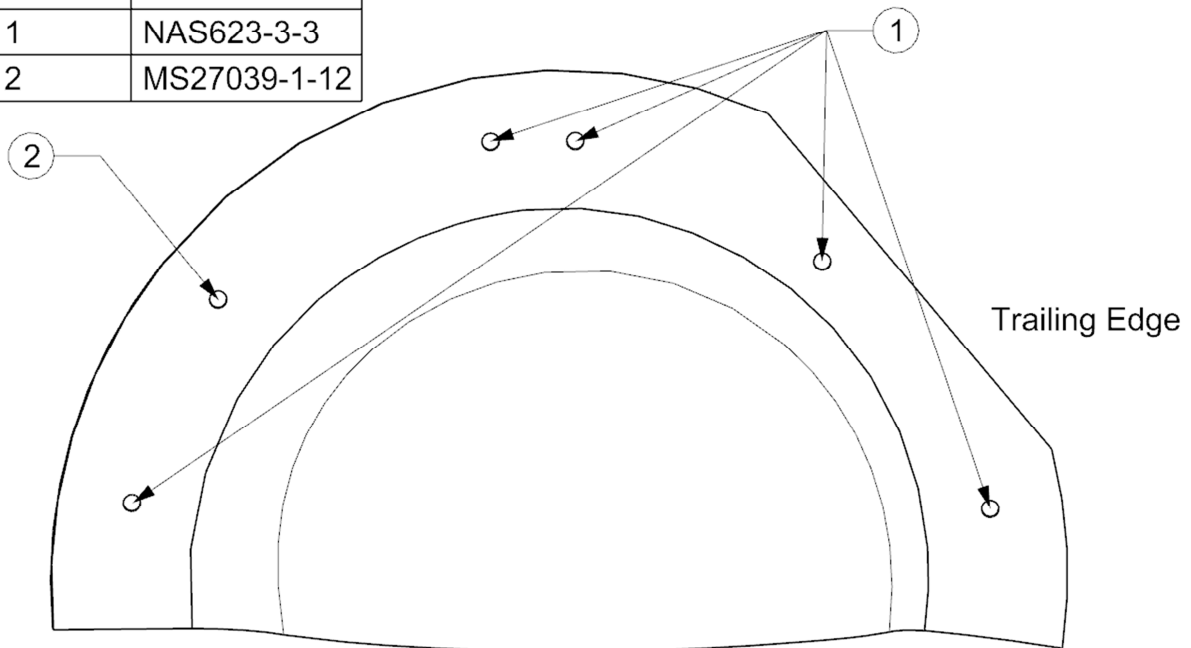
Inboard Wing Pylon Aft Lug Cover Fastener Placement
